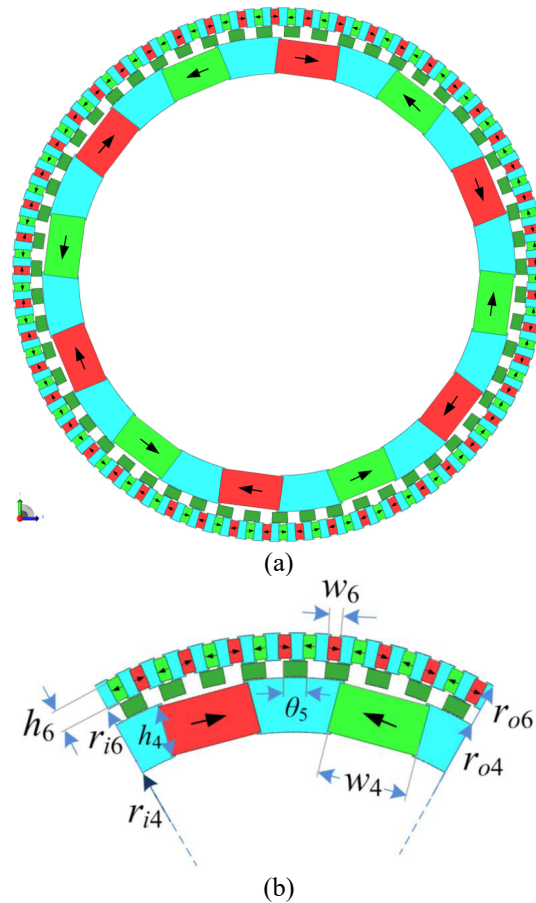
(a) Initial Design #1 of stage 2 magnetic arrangement for the series connected magnetic gearbox
